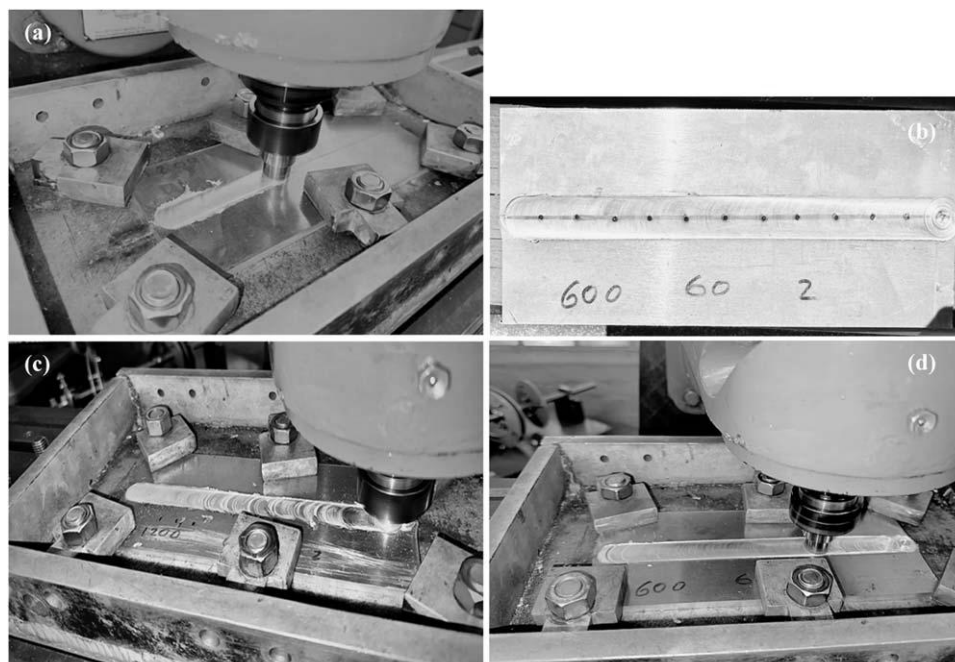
(a) FSW process; (b) Hole drilling and filling with reinforcement particles; (c) Closing of hole with pin less tool; (d) FSP single pass process.
